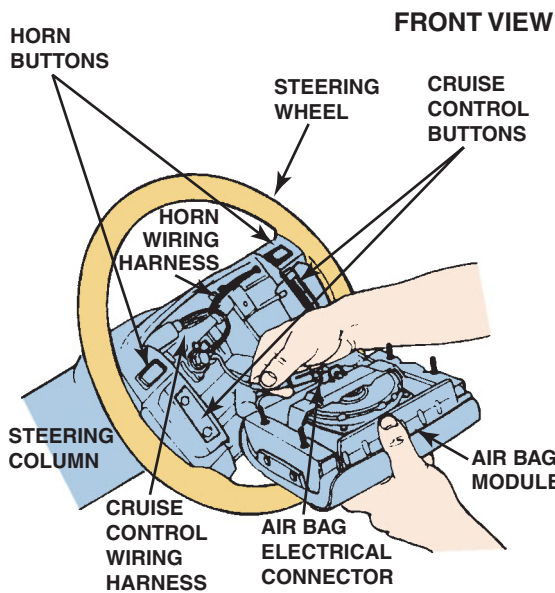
After disconnecting the battery and the yellow connector at the base of the steering column, the airbag inflator module can be removed from the steering wheel and the yellow airbag electrical connector at the inflator module disconnected.
